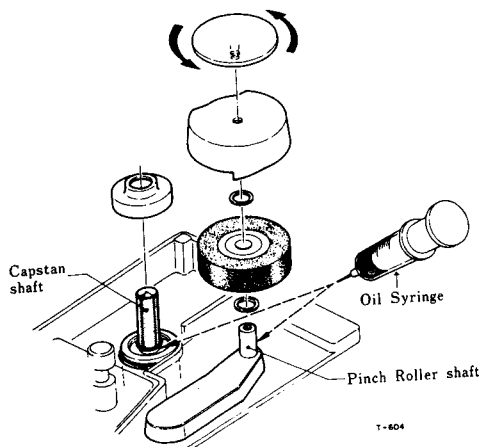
Capstan Shaft and Pinch Roller Shaft Oiling Points
